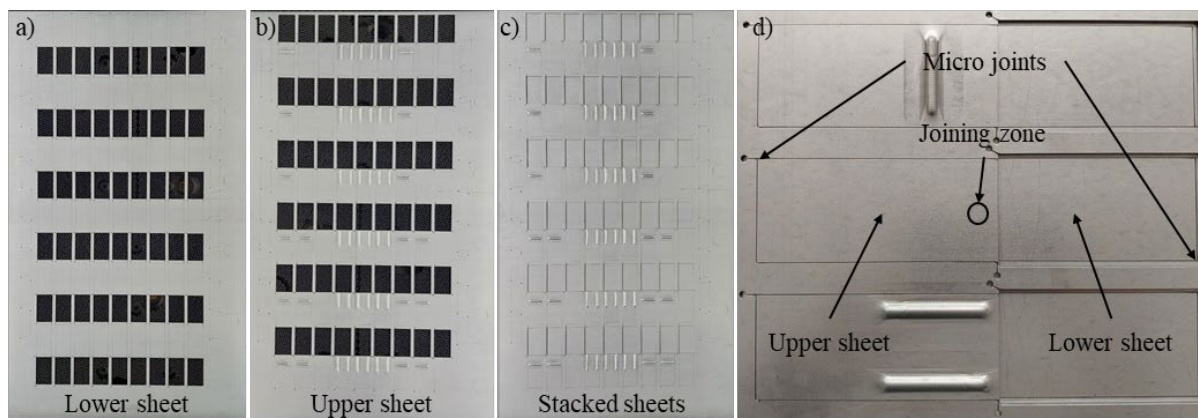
Sheet metal layer before clinching, a) Lower sheet, b) Upper sheet, c) Stacked sheets, d) Detailed view of stacked sheet metal for clinching of shear tensile test specimen
